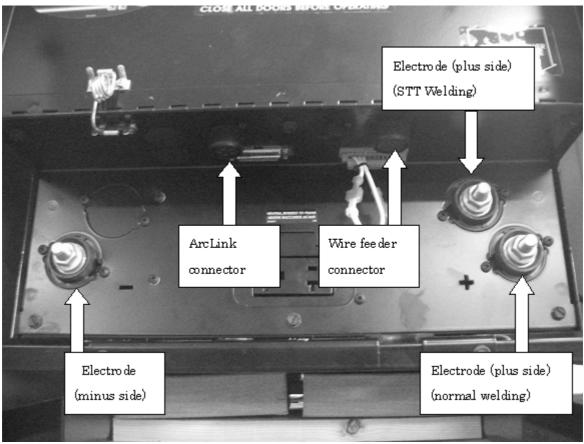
(c) Connection interface of Welding power supply of ROBOWELD iC/H2 (Power Wave 455M/STT)
